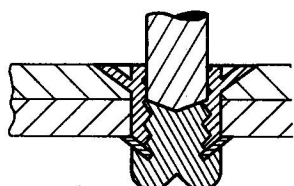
Dimensional Check of Installed Internal-Threaded Blind Fasteners
